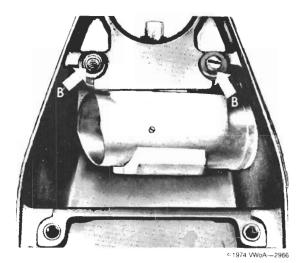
Screws (arrows B) that hold the late-type lock in the lock housing.
